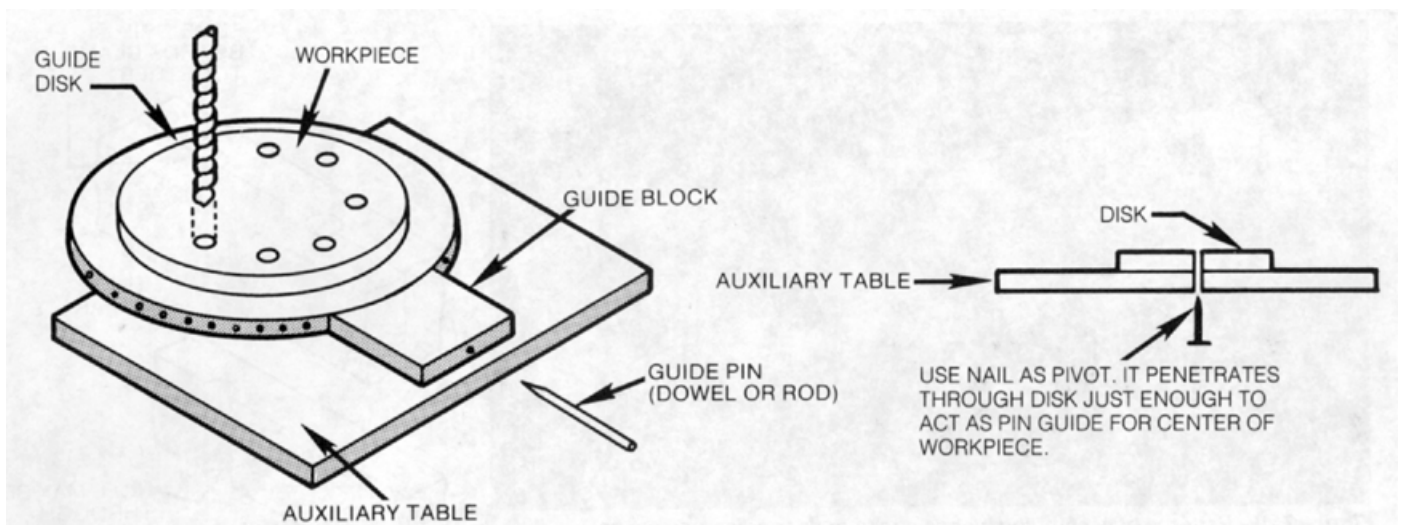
Construction details of an indexing device that will automatically position the workpiece regardless of hole spacing or radila distance.
